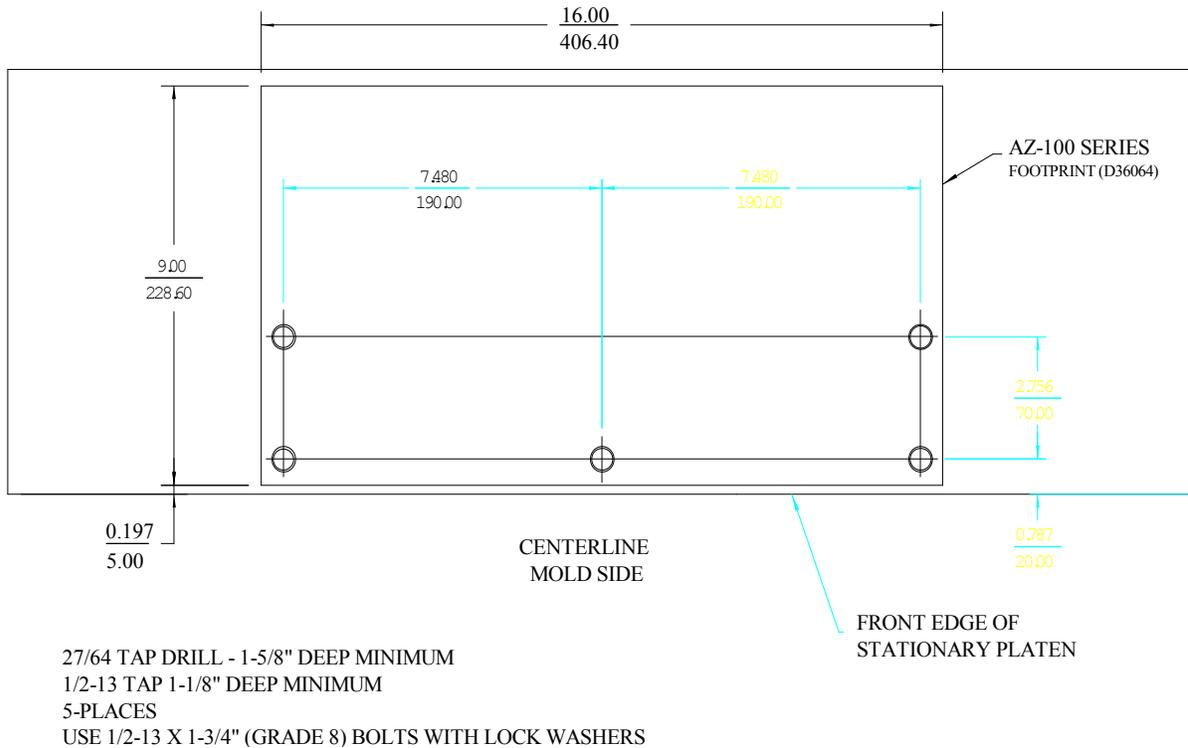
AZ-210-310 Mounting Hole Location
